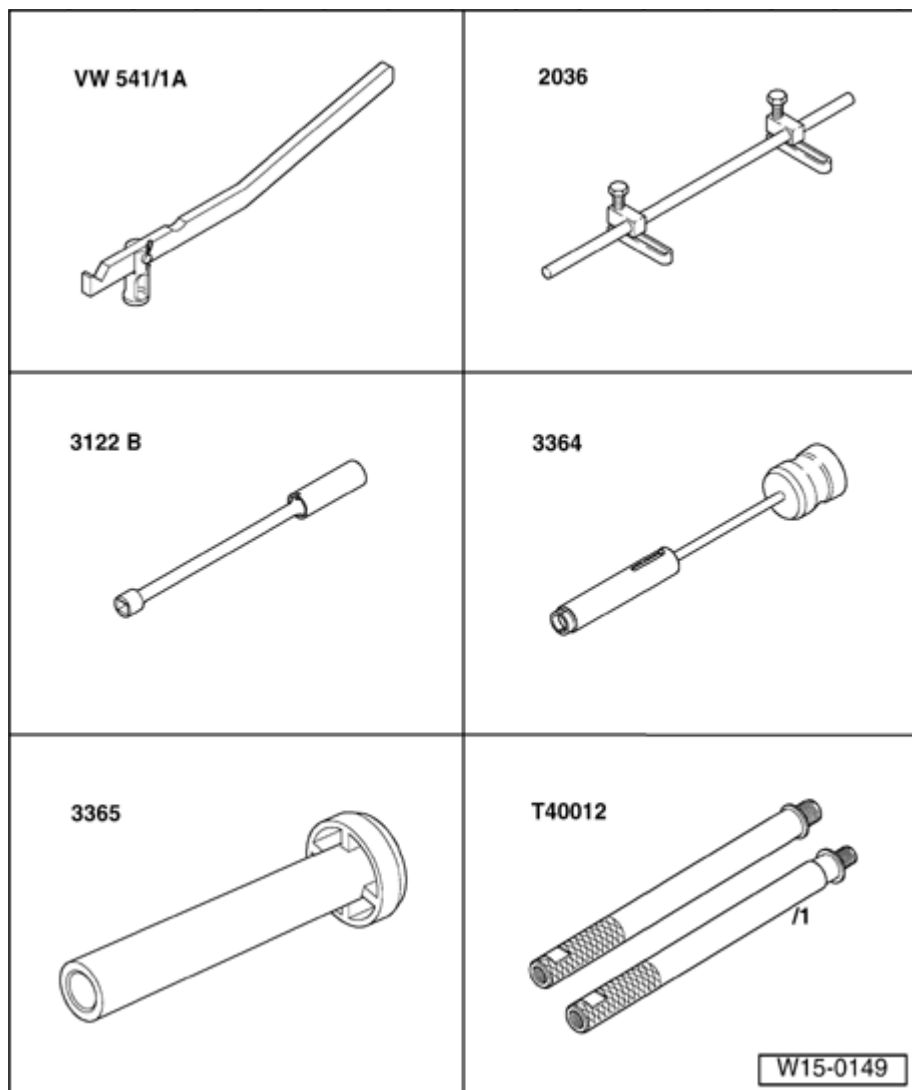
Identifying Special Tools - Valve Stem Oil Seals, Replacing
